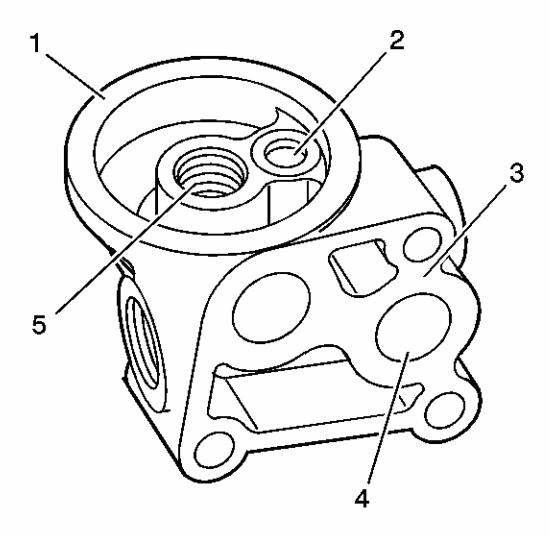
View Of Additional Inspection Areas Of Oil Filter Adapter (with Oil Cooler)
